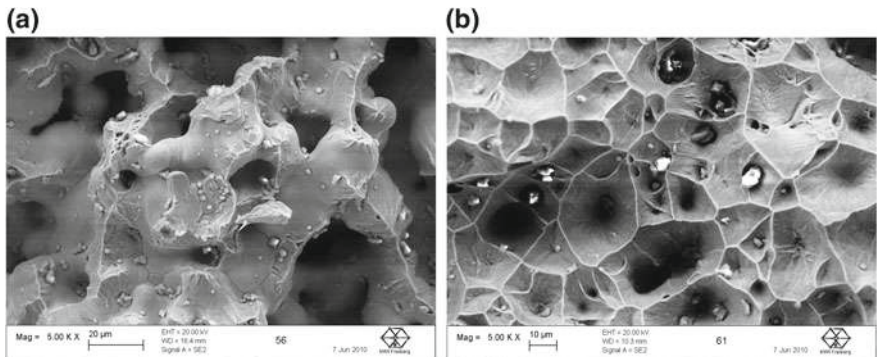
The fracture surfaces for steel samples sintered under vacuum for 2 h at sintering temperatures of 1350 °C (a) and 1400 °C (b)
